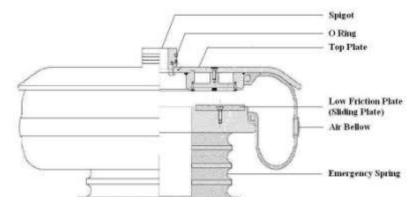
Air Spring Assembly With External Emergency Spring
